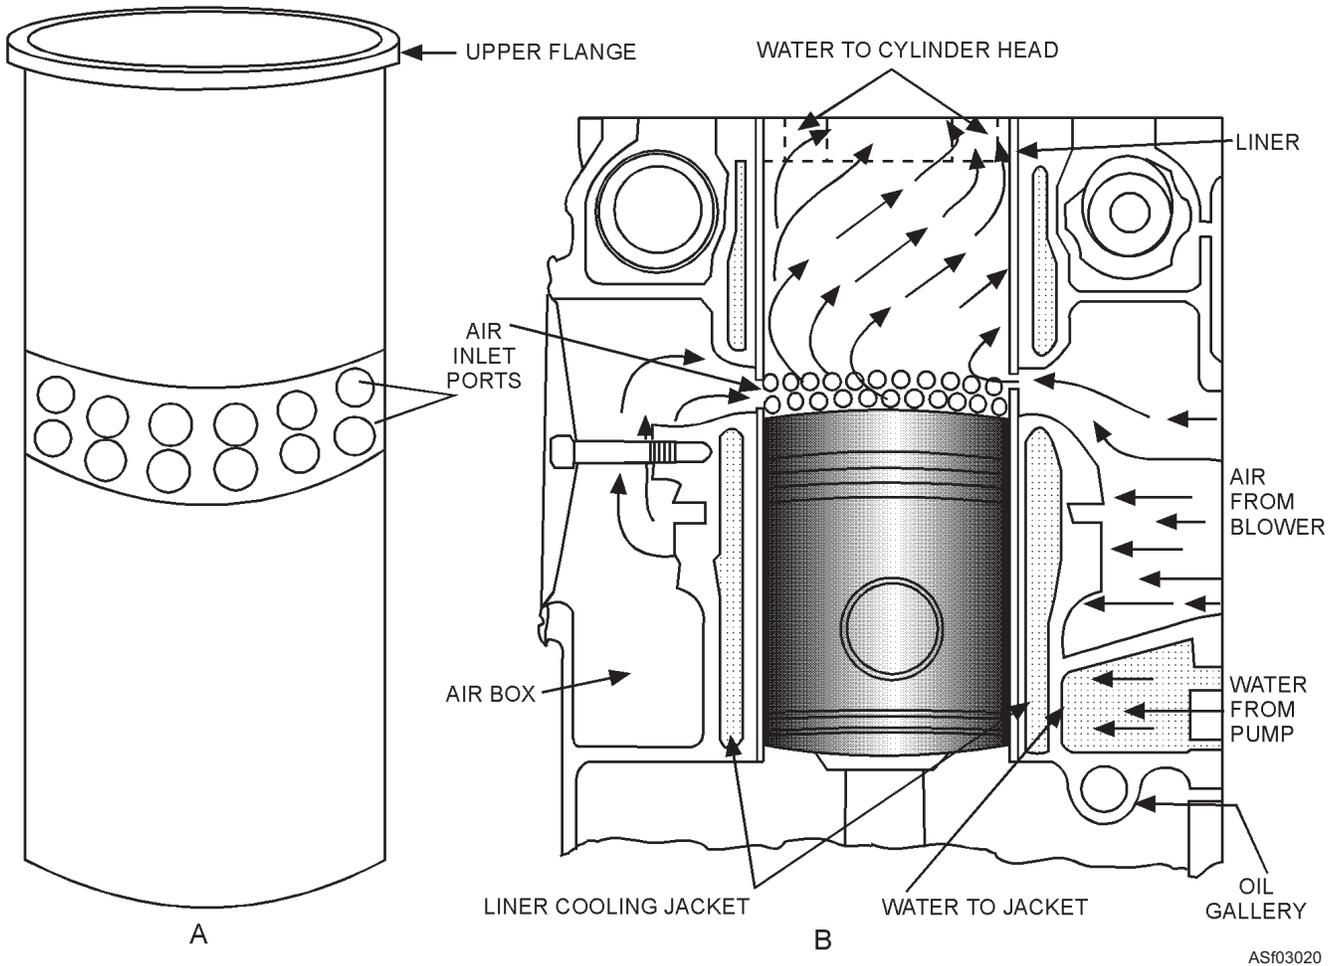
(A) Dry-type liner for 2-cycle General Motors series engines. (B) Section through series 71 block.
